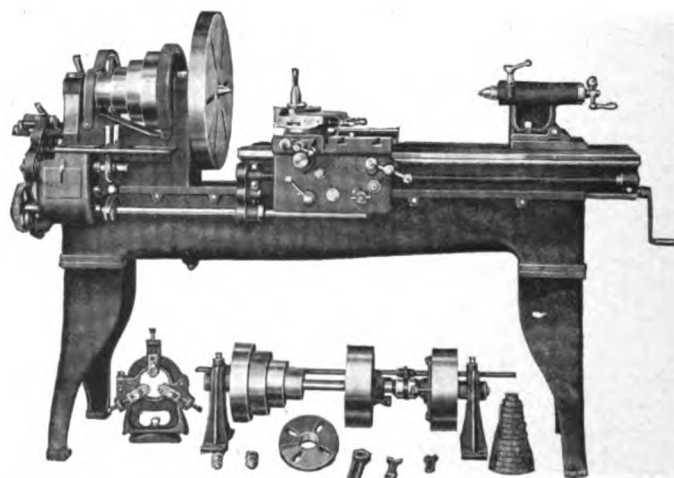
14-24-Inch Sliding Extension Gap Lathe
